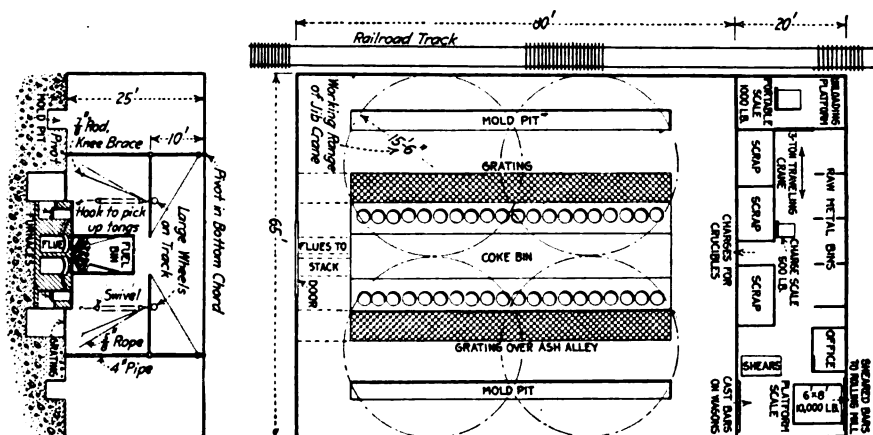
PLAN AND SECTION OF CASTING SHOP
